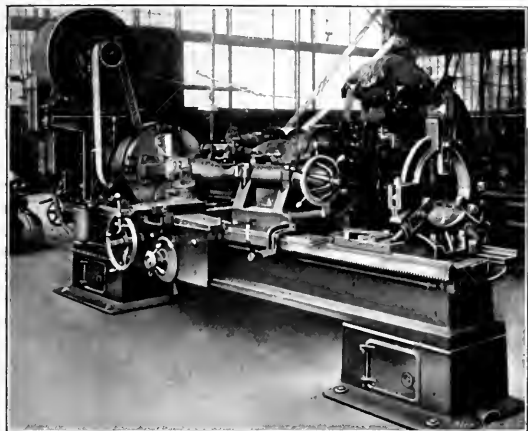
Ten Horse-power Motor Operating a 26-Inch Bullard Lathe; a 7-Inch Projectile in Process of Turning.
